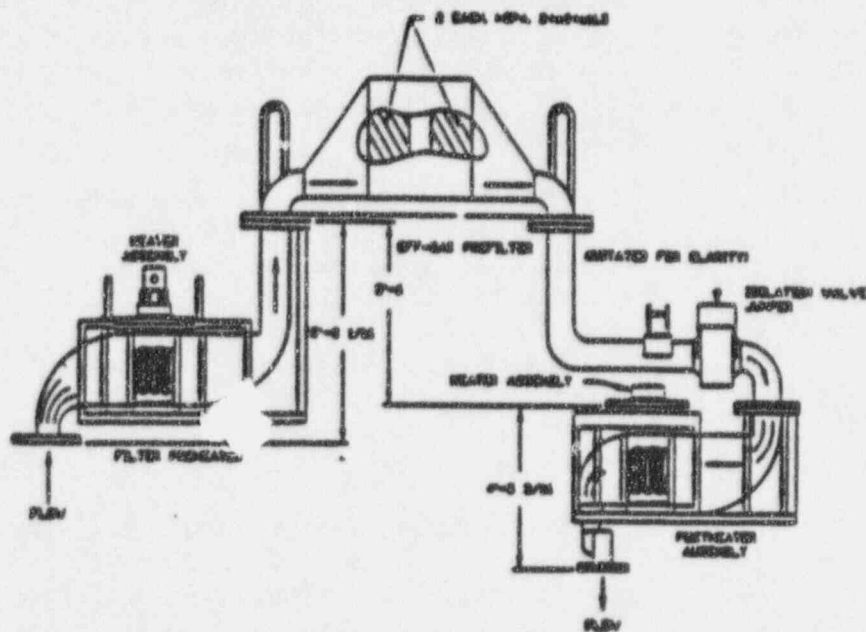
Filter Preheater, Prefilter, Off-Gas Jumper to Postheater, and Postheater
